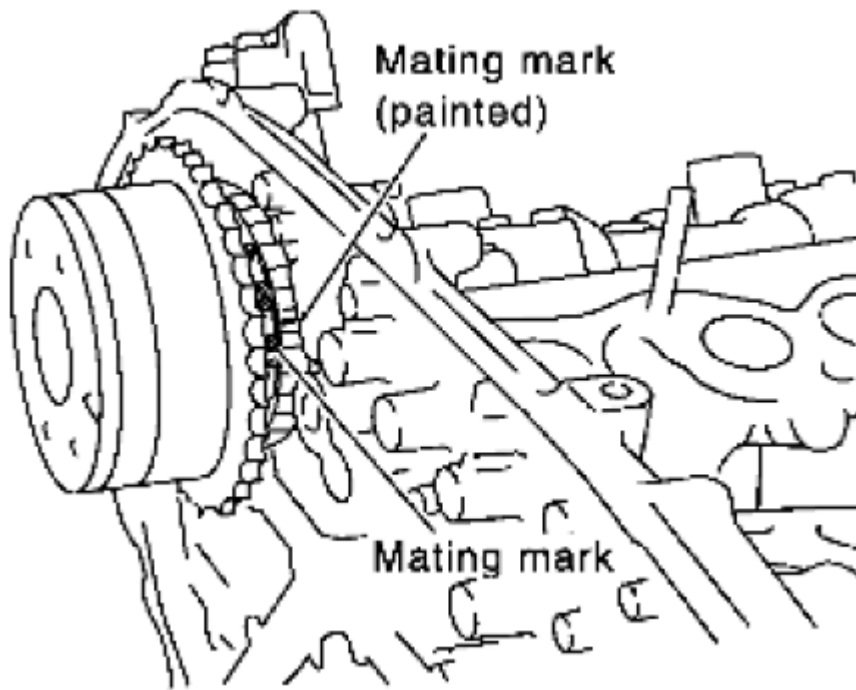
Identifying Mating Mark On Top Of Sprocket Teeth
